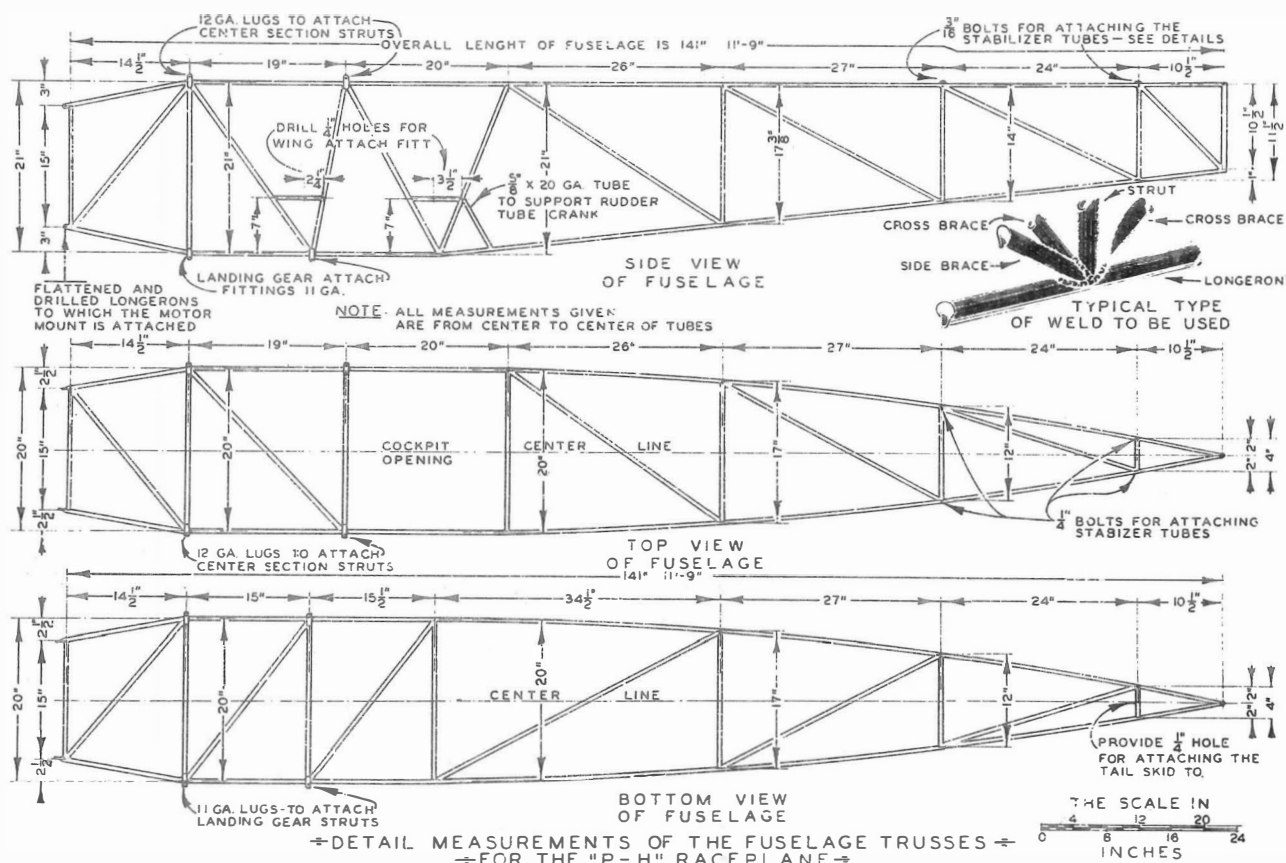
The lines for your fuselage should be laid out on a level surface from these drawings.
